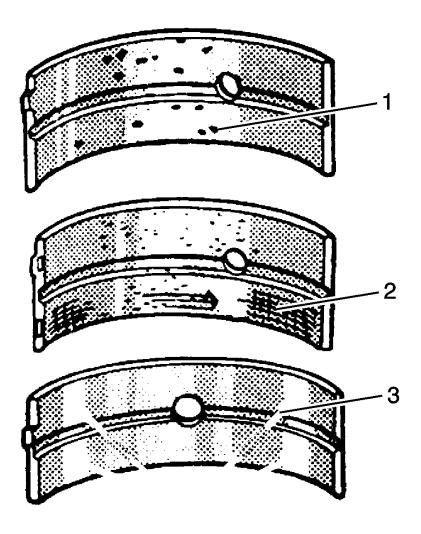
Inspecting Crankshaft Bearings For Craters Or Pockets Courtesy of GENERAL MOTORS COMPANY
